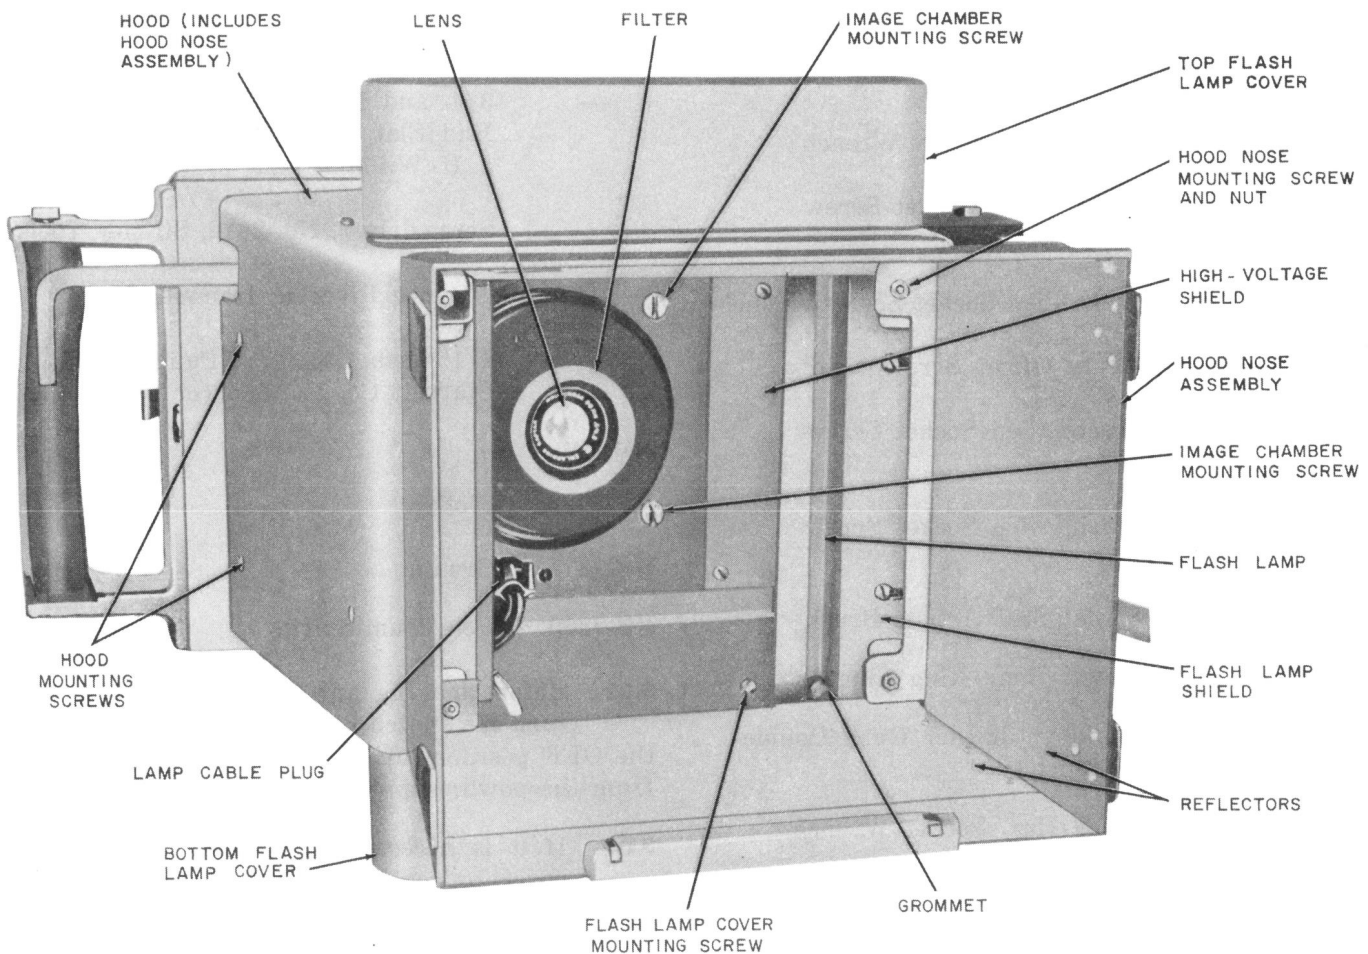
KS-14593 L2 Message Register Camera Showing Lens, Filter, and Hood Nose Assembly
